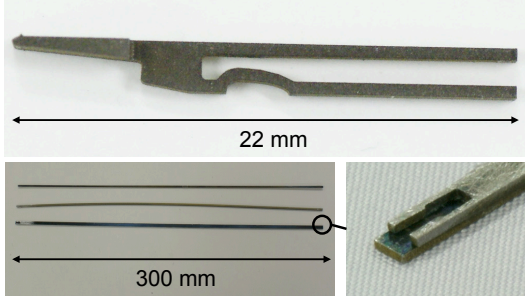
Upper panel shows the fabricated spring blade. Two spring blades are fixed to the end of a rigid link bar to transmit the force from the handle mechanism, as shown in the lower panels.
